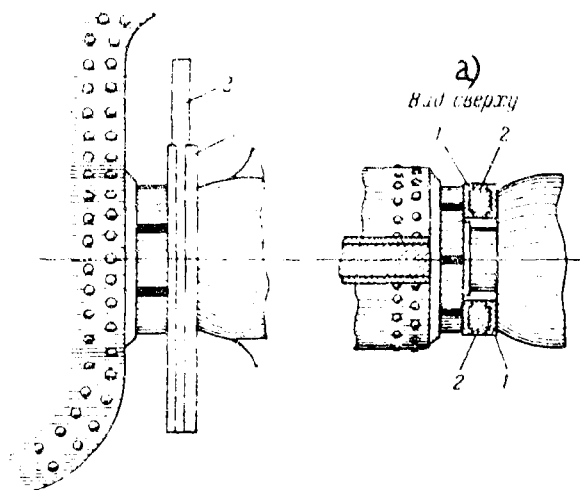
Wedge Method of Removing Propeller Screw. Key: a) view from the top.
